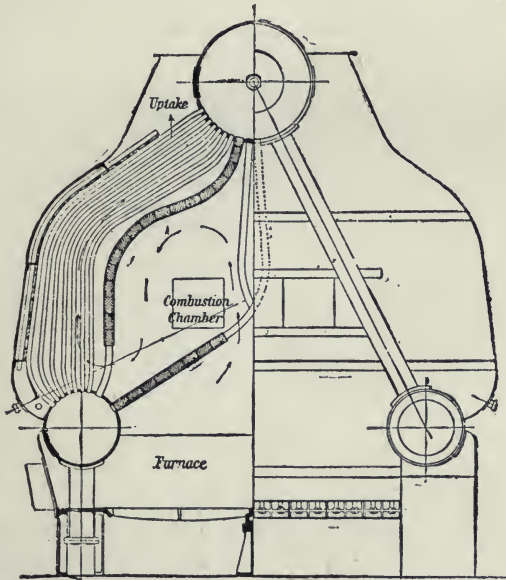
WEIR SMALL TUBE BOILER, WITH REFRACTORY COMBUSTION CHAMBER.
